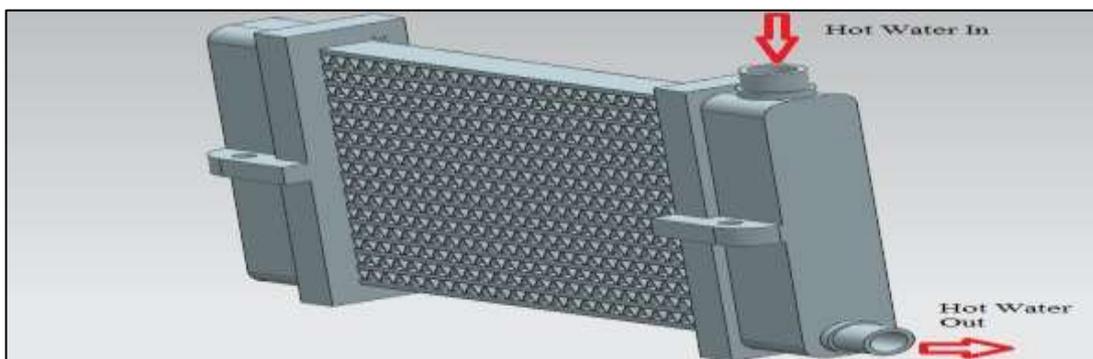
[b]: 3D Geometry of the Flat Microchannel Heat exchanger
